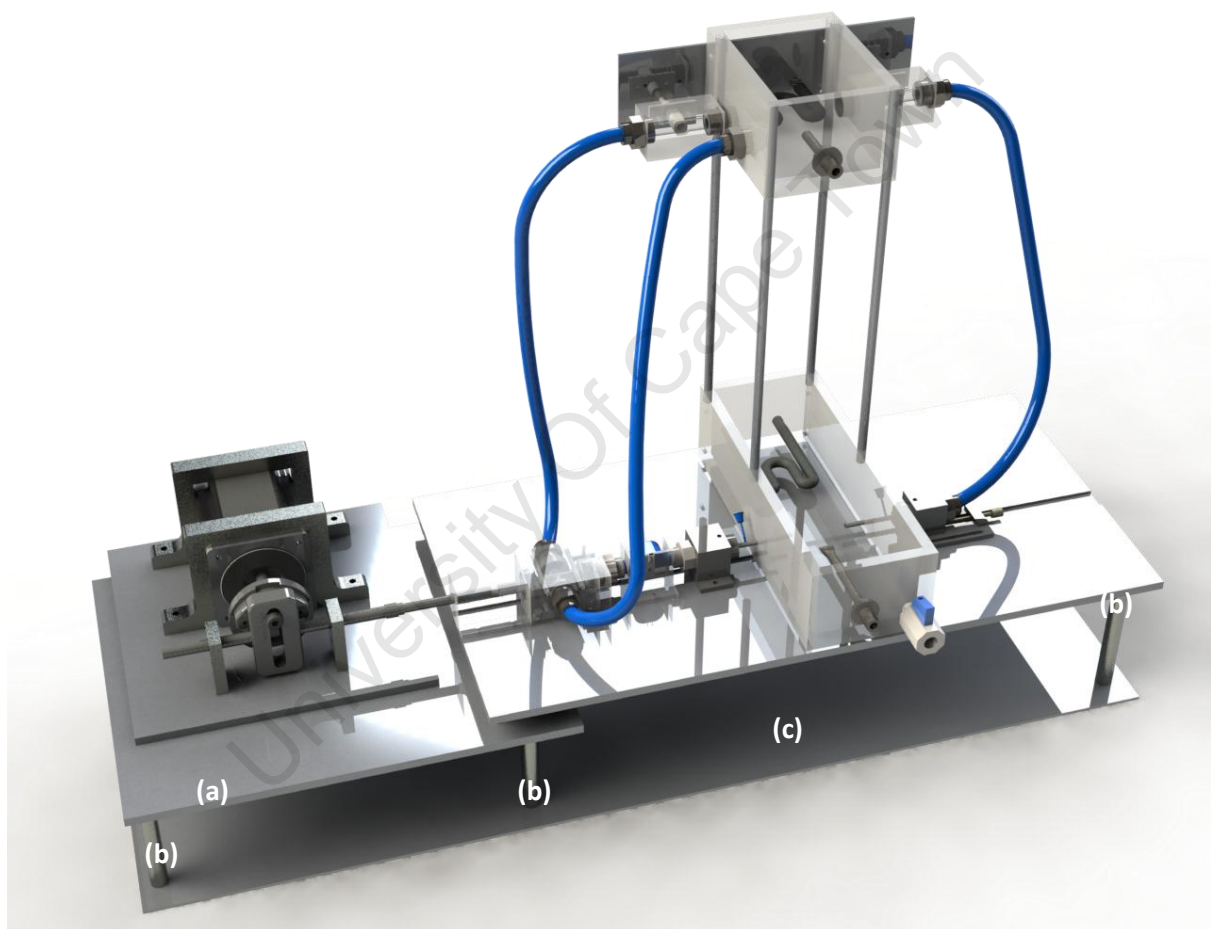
Solidworks render of the integrated mechanical assembly: (a) aluminium extension platform, (b) aluminium support rods, (c) parcel shelf
